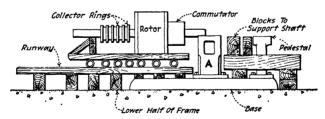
Showing the second step of a method of rolling a rotor into position in the bearings. The fore part of the skids are cut off and the armature is supported on the skids.
